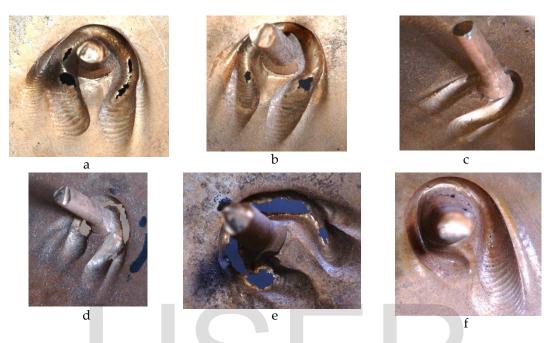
The erosive corrosion models: a- grooves; b- holes; c - hollows horseshoe; d - directional hollow ; e - half-moon cavities; f - waves.
